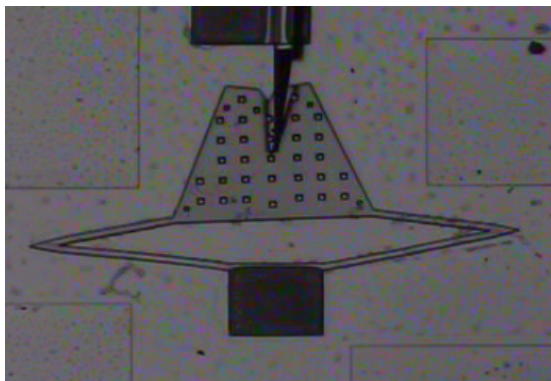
Assembly failure due to soft springs (box-type spring).
